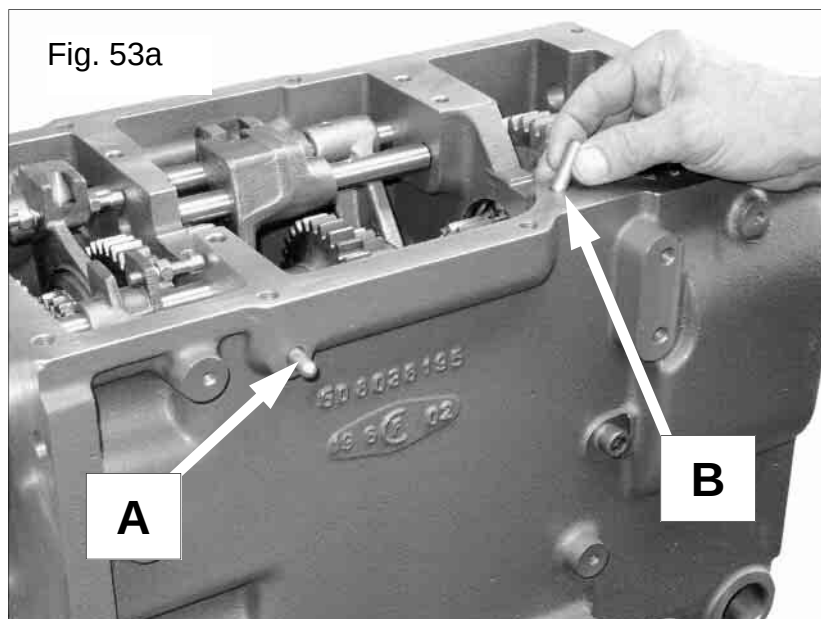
illustrates the other retainers to install in the gearbox during the assembly phase.
